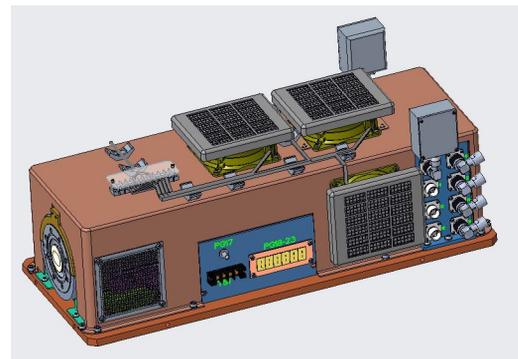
Complete BTA ferrite-loaded kicker assembly.
